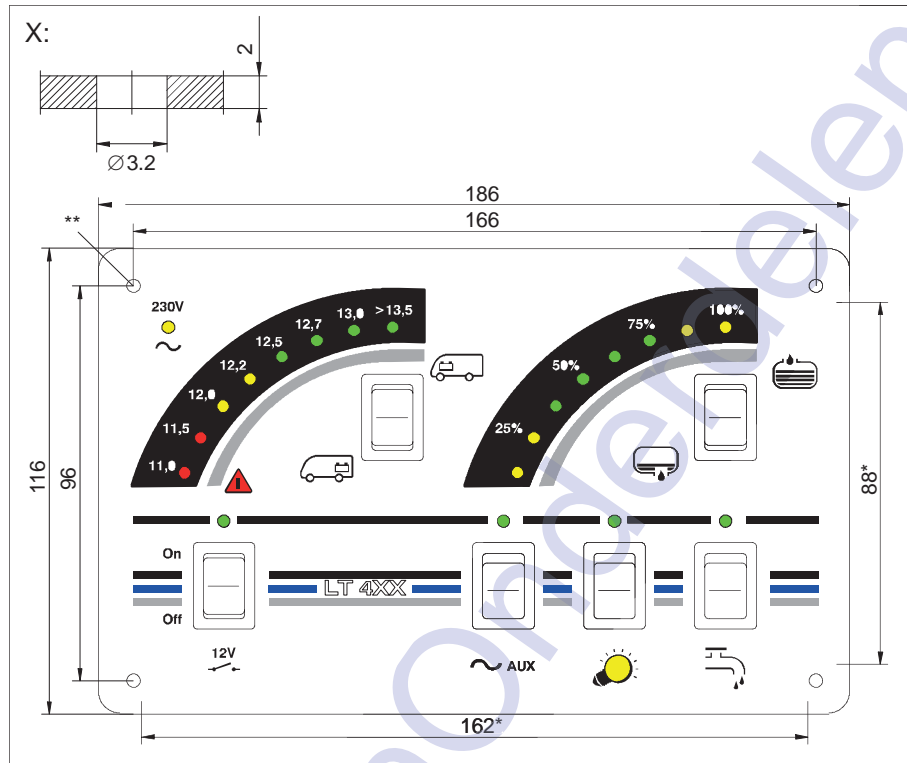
Dimensional diagram for LT 400a switch panel (dimensions in mm)
